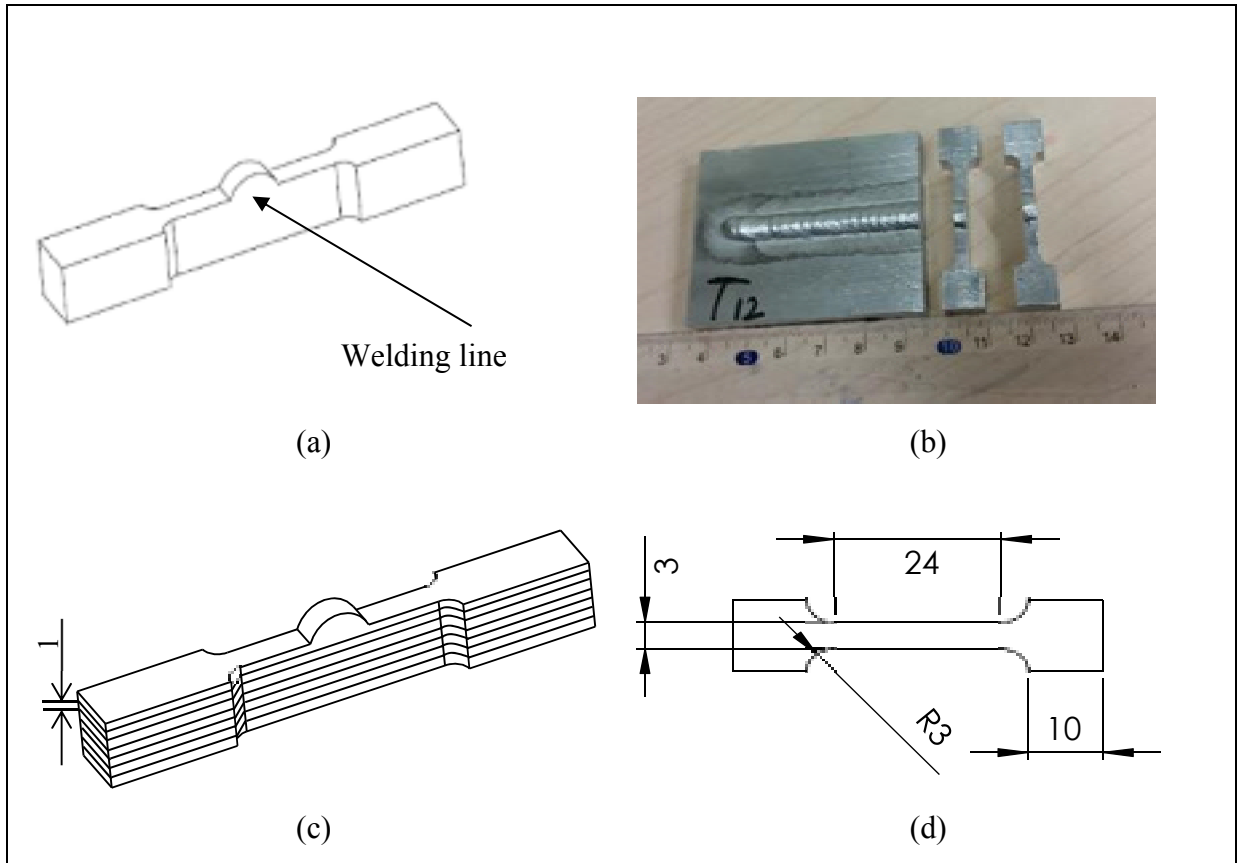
DIC of machined samples transverse to the weld direction, a) and b) machined specimen, c) and d) the extracted samples
